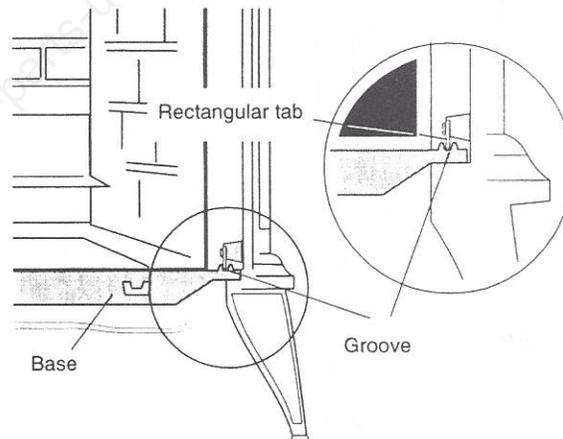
Install the Firebox Assembly. Be sure that the tabs on the stove sides engage the grooves on both ends of the Base.
